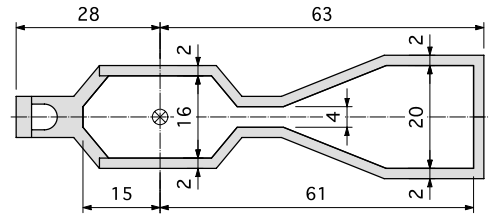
Cross-sectional drawing of a straight section chamber with a beam chamber of 16 mm × 30 mm.
